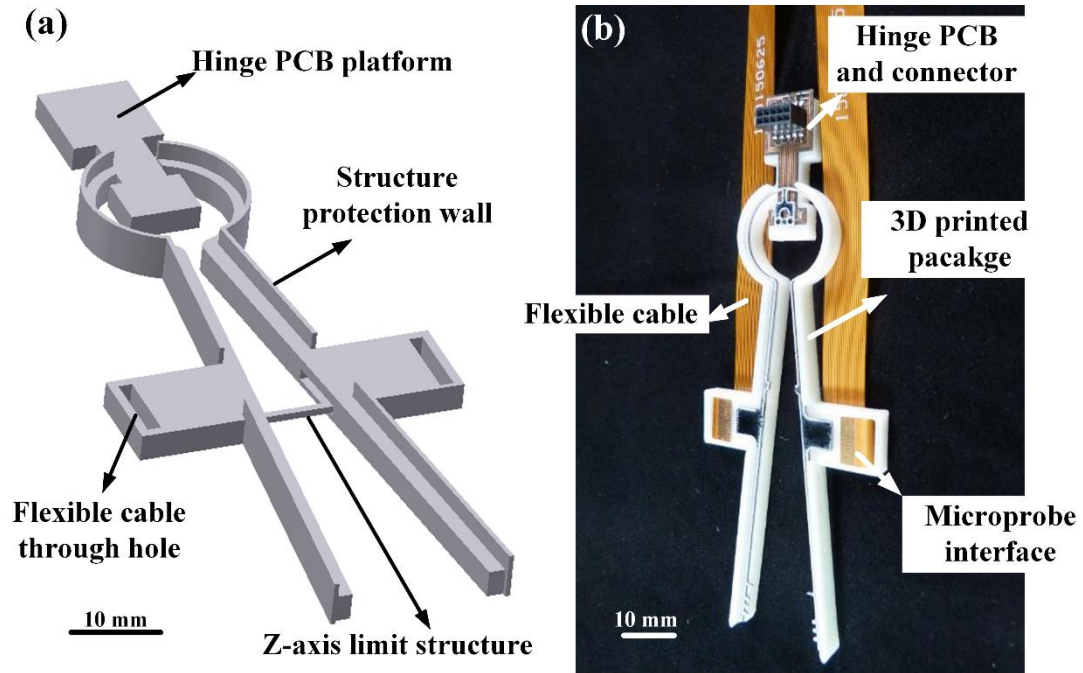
(a) 3D printed package for the tweezer device. An extended platform on the top of the tweezer is used for holding hinge PCB. Two through holes at the arm location is used for installing flexible cables. A z-axis limit structure between two legs is designed to increase the out-of-plane rigidity. (b) Picture of assembled silicon tweezer with two flexible cable interfacing microprobes and one hinge PCB for interfacing the displacement sensor on the hinge structure.
